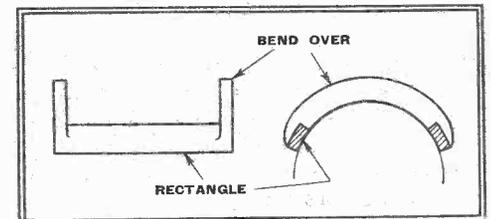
The general shape of a scanning coil is shown by these drawings.
